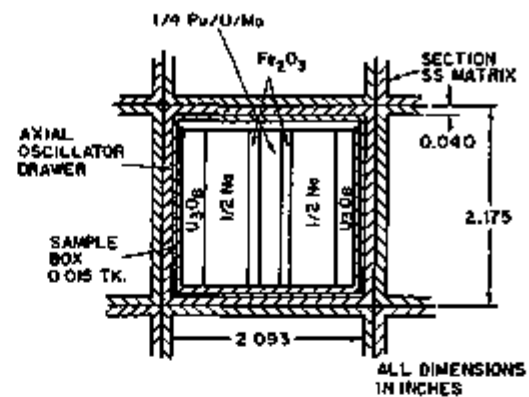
Cross Section of Central Matrix Tube Containing Axial Oscillator Drawer and Sample Box, ZPR-6 Assembly 7. ANL Neg. No. 116-1055.
